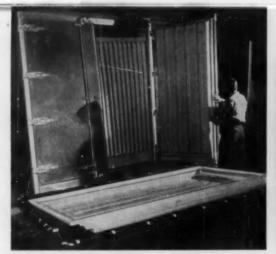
Plastic door liners and corrugated wall liners reduce dead weight and increase truck's pay load. (Photo, Rohm & Haas)
